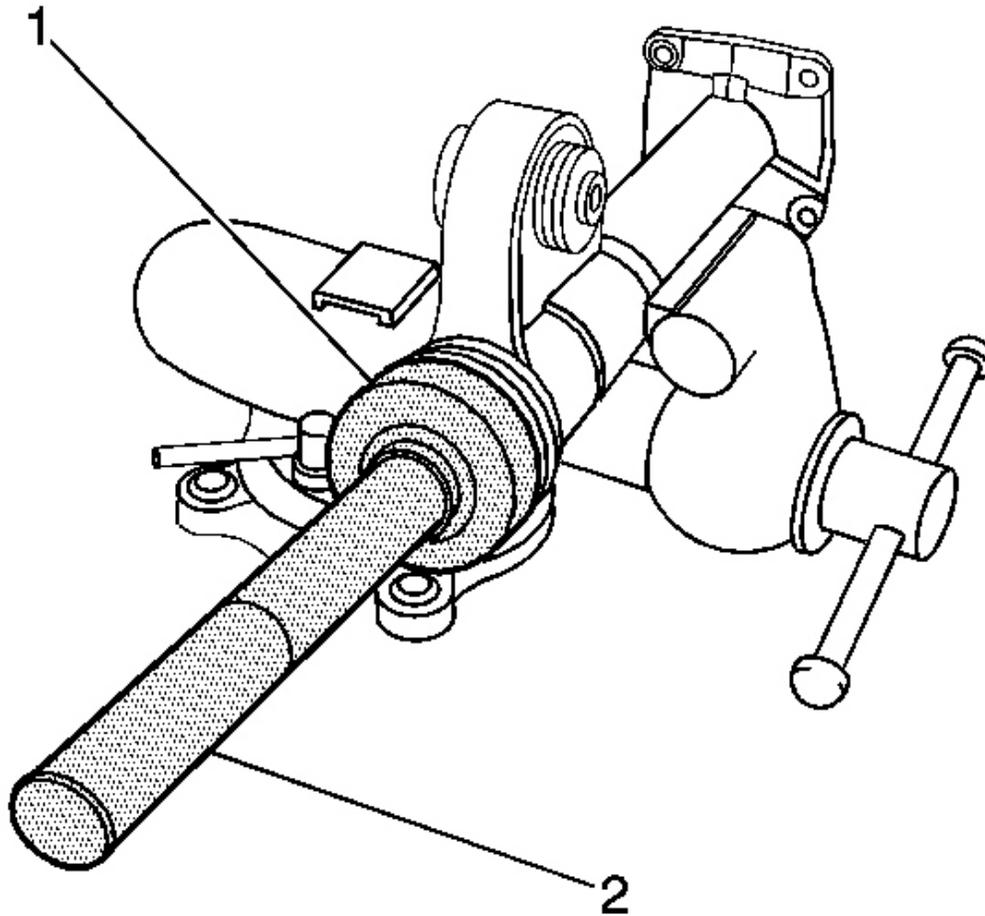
Installing New Axle Shaft Seal Using J 45225 & J8092
